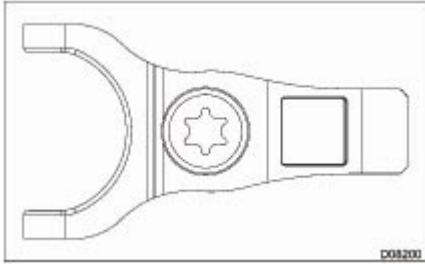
Previous Level Injector Hold Down Clamp Assembly
